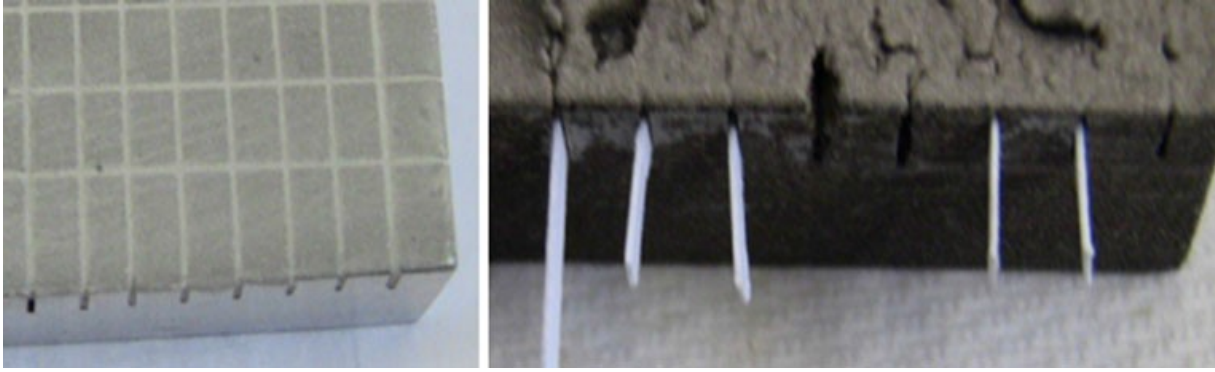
(left) Al block with machined grooves filled with PVA/sand mixture to demonstrate gap filling (right) Sample after deposition of 0.7-mm NiCr and bake-out of filler material at 400 °C
